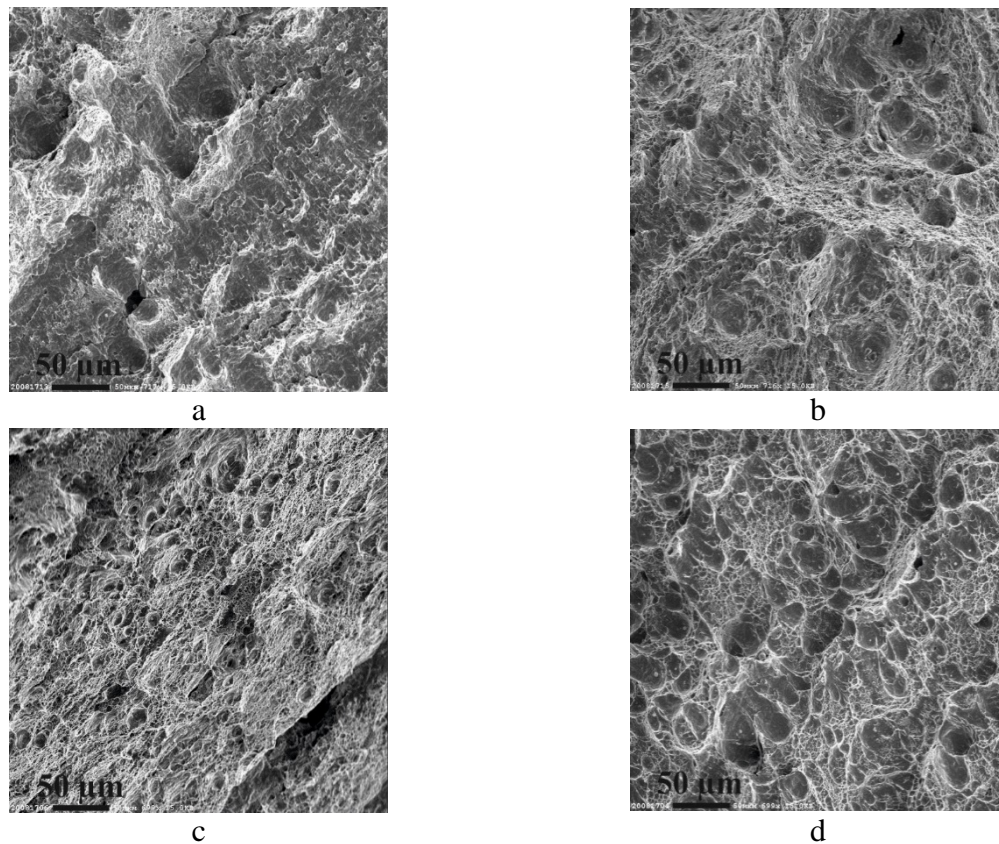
Fracture surfaces of Sharpy specimens with notches at the fusion line (a, b) and 2 mm from the latter (c, d)
